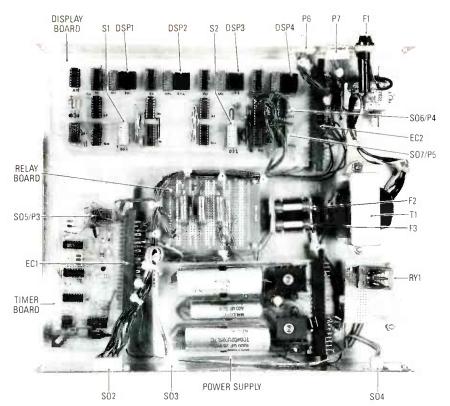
THE MAIN CHASSIS ASSEMBLY of the alarm. There are two circuit boards, two relay boards, and a power-supply board.
